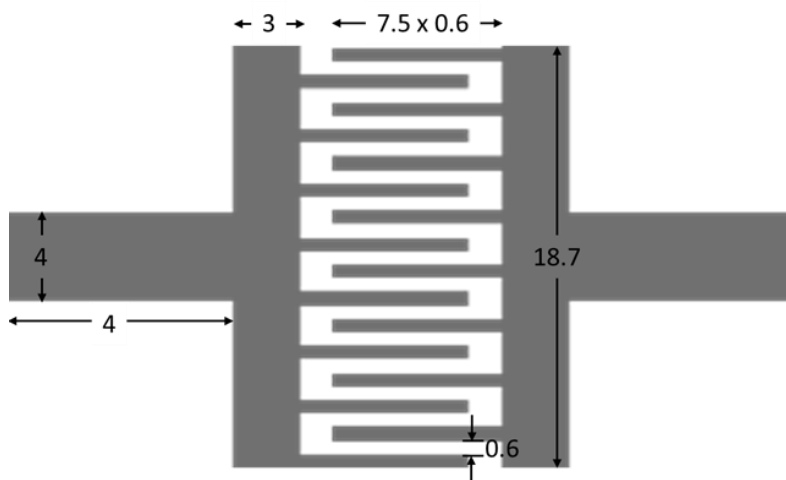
IDE dimension and layout. All measurements are in mm
